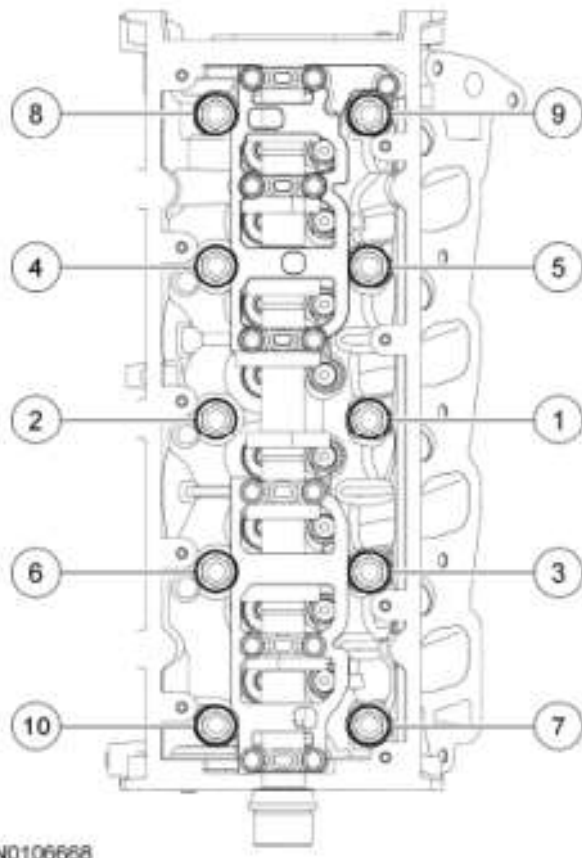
Identifying Cylinder Head Bolts In Sequence
